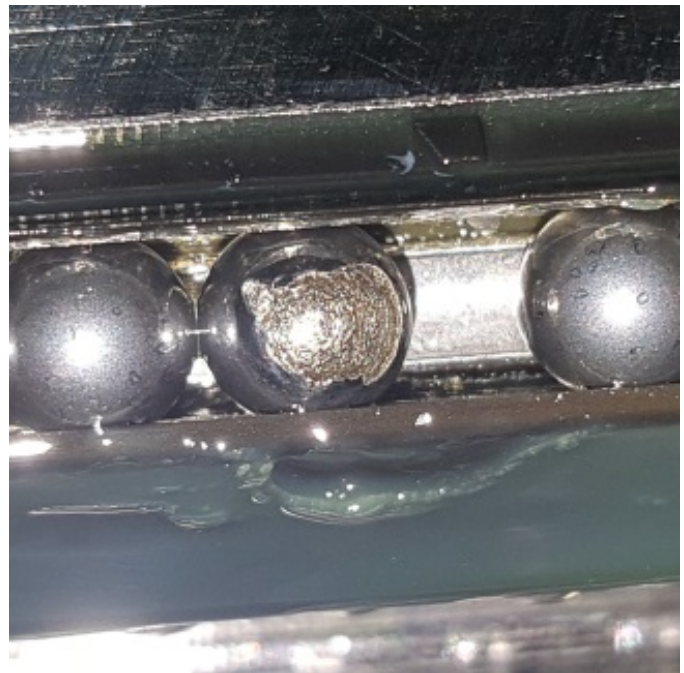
Pitting damage to a ball rolling element at LWM.
